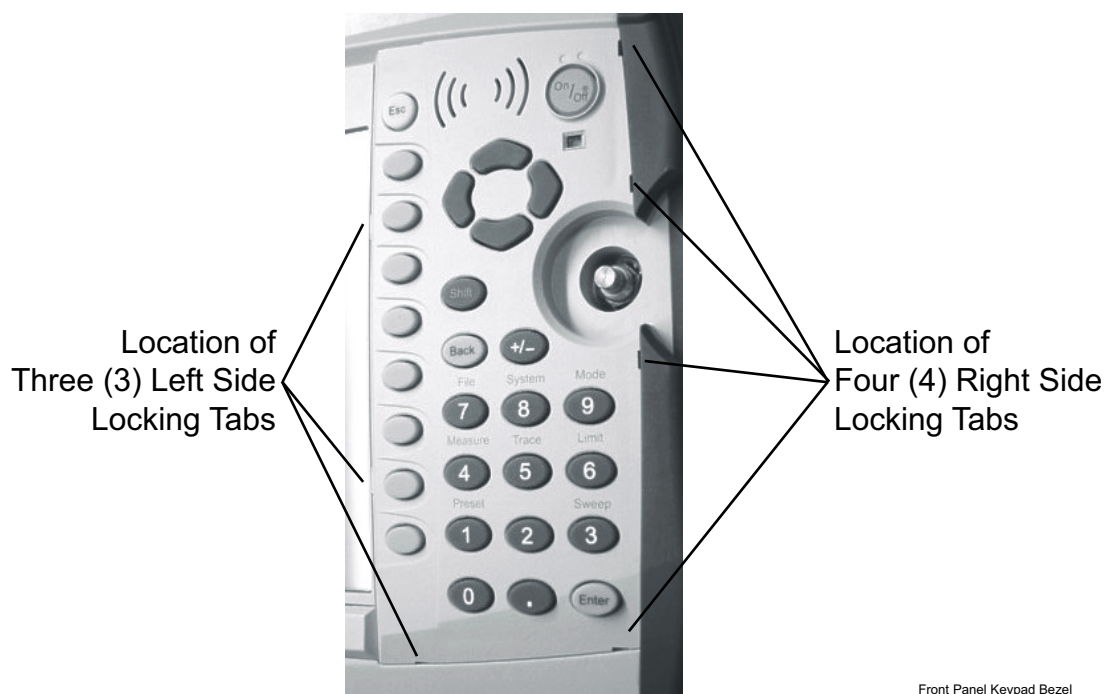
Front Panel Keypad Bezel and Locking Tab Locations
